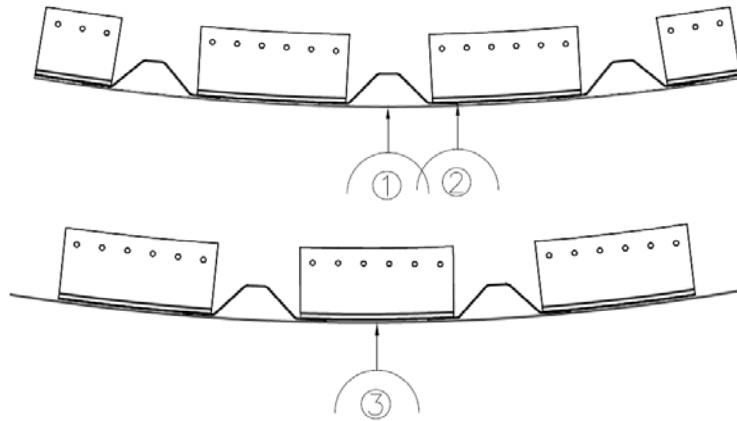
Stringer panel impact locations for 2-stringer and 3-stringer panels
